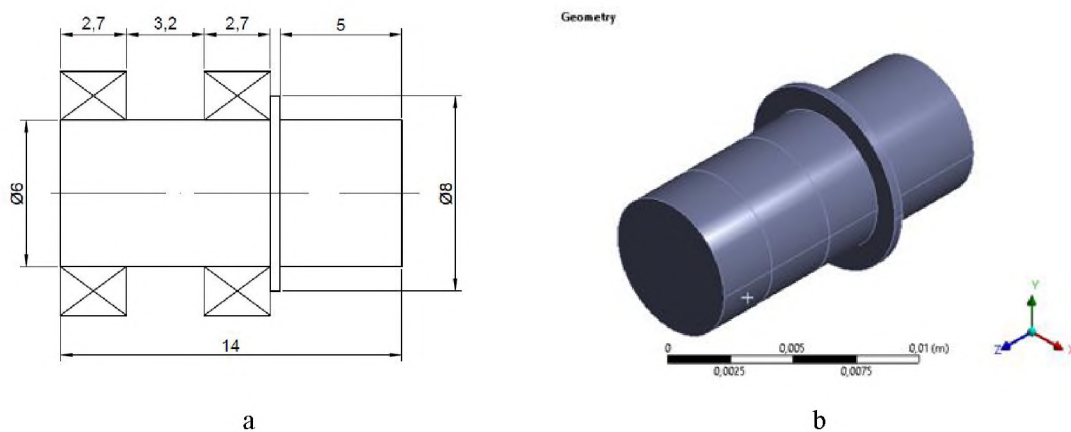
Sketch (a) and geometry model (b) of the planetary gearbox satellite shaft
